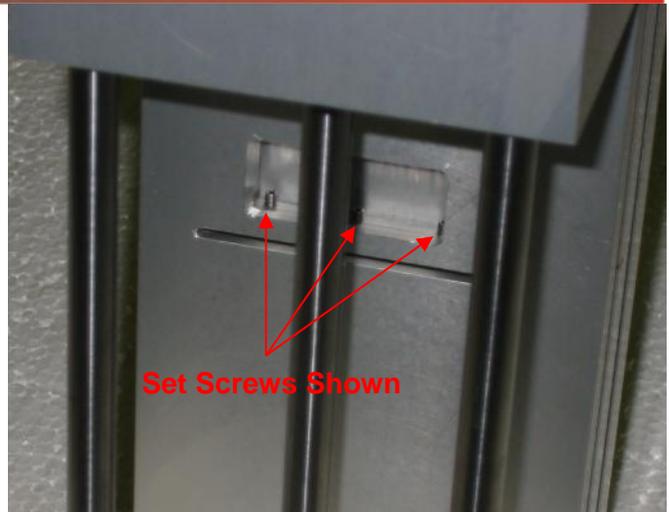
This figure shows the cut out to remove or adjust vertical perf. Three set screws must be loosened. Removal is same as the horizontal perf.
